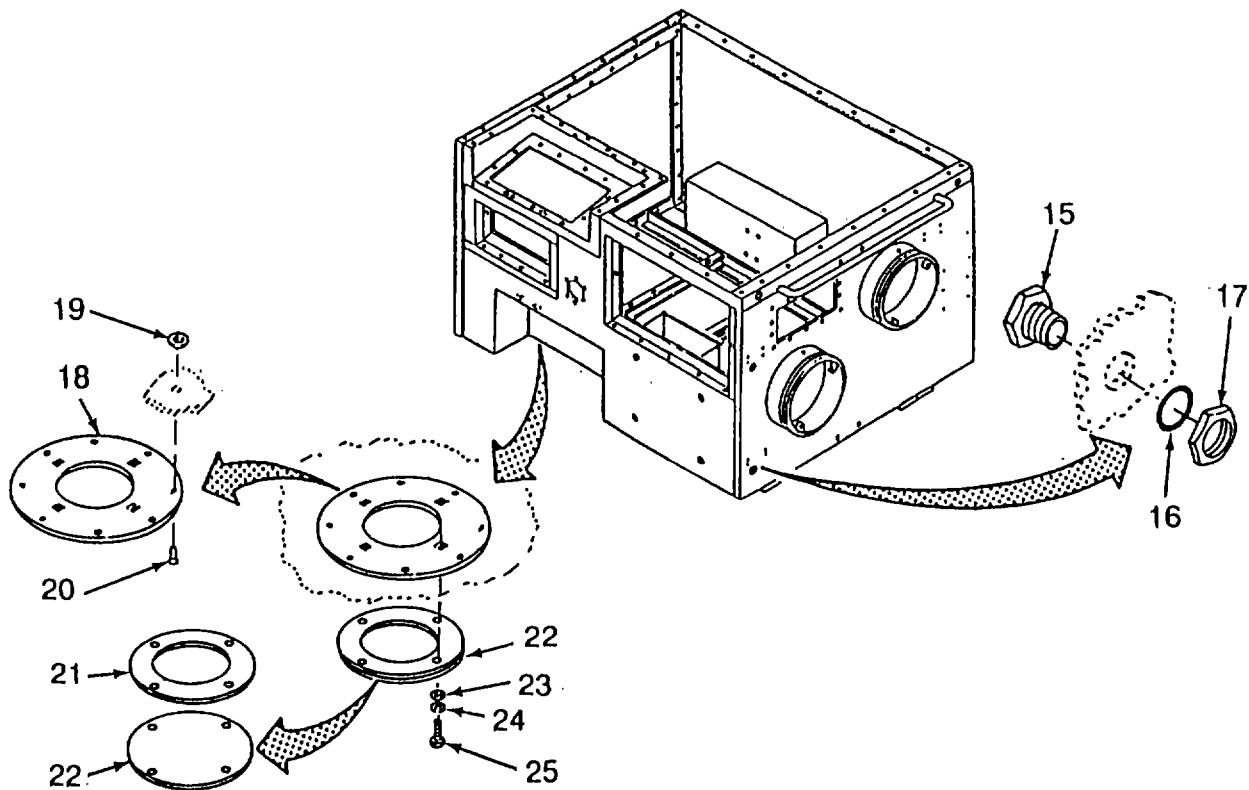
Frame Assembly (Sheet 1 of 2)
